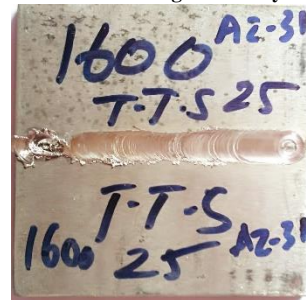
The weld made at 1600rpm at 25 tool traverse speed with similar welding Az31 alloy
